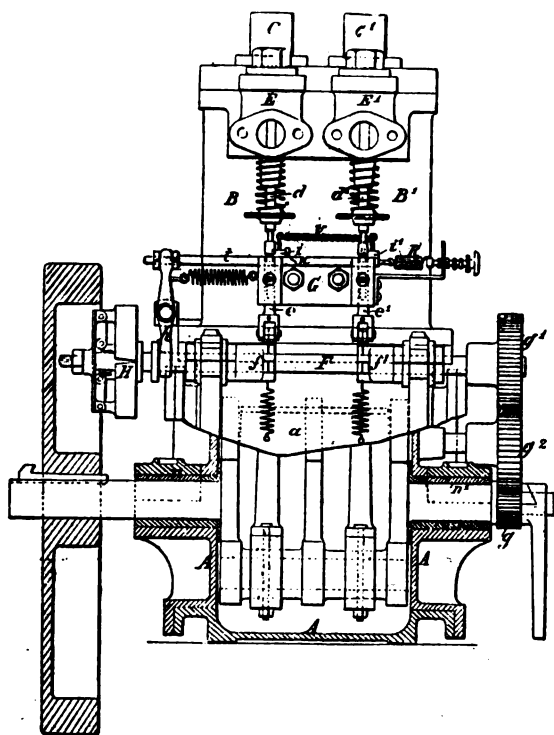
PART-SECTIONAL ELEVATION OF MOTOR.
